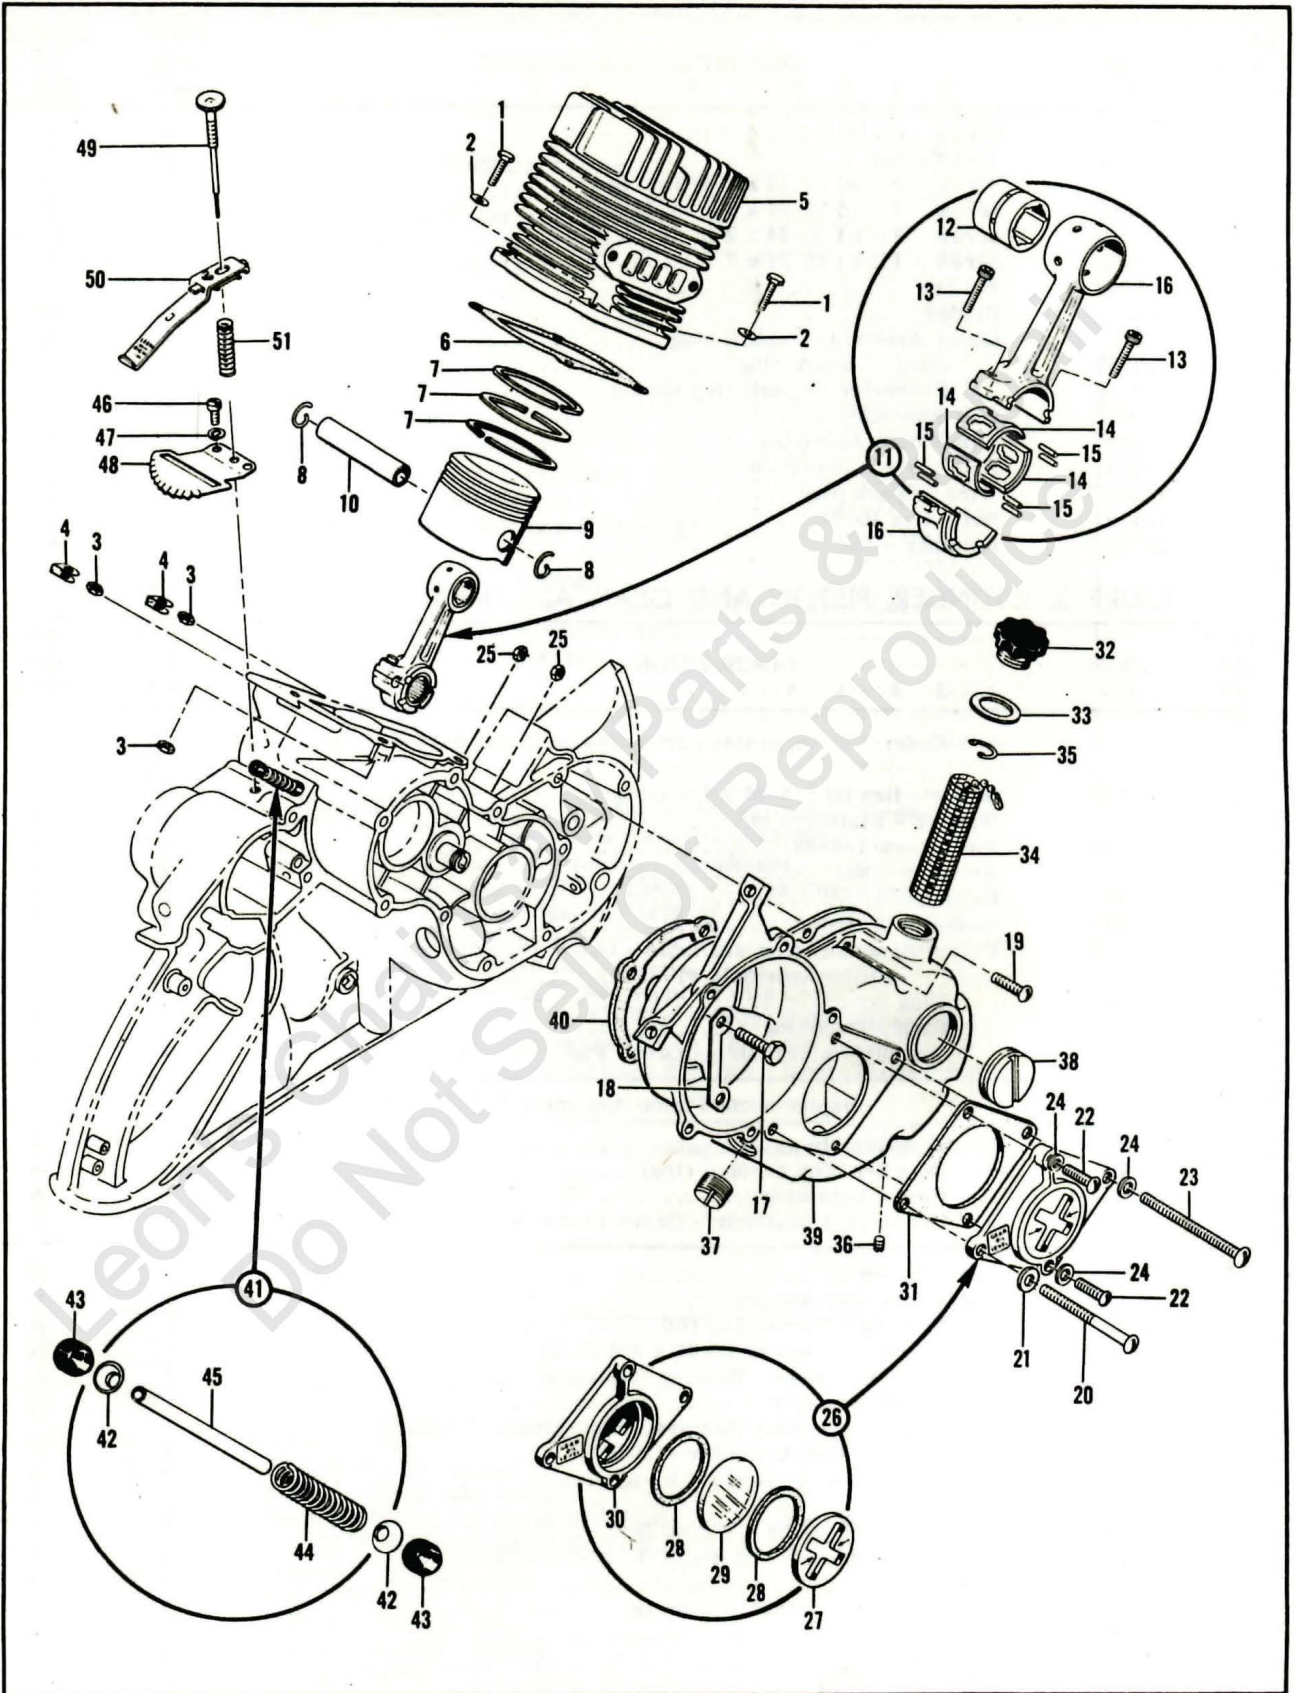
Cylinder, Piston and Gearcase (Model 3-25 Engines Only)
